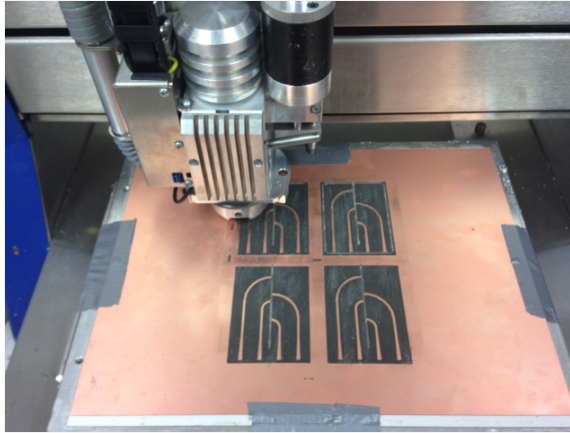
SDSU AML's LPKF S42 PCB fabrication machine shown building components for the prototypes used in chapter 4.
